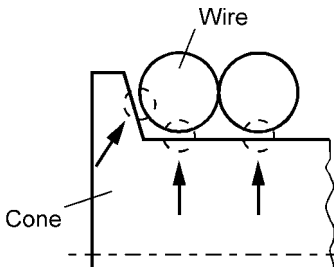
Contact between wire and cone—sliding friction on slip-type drawing machines.
